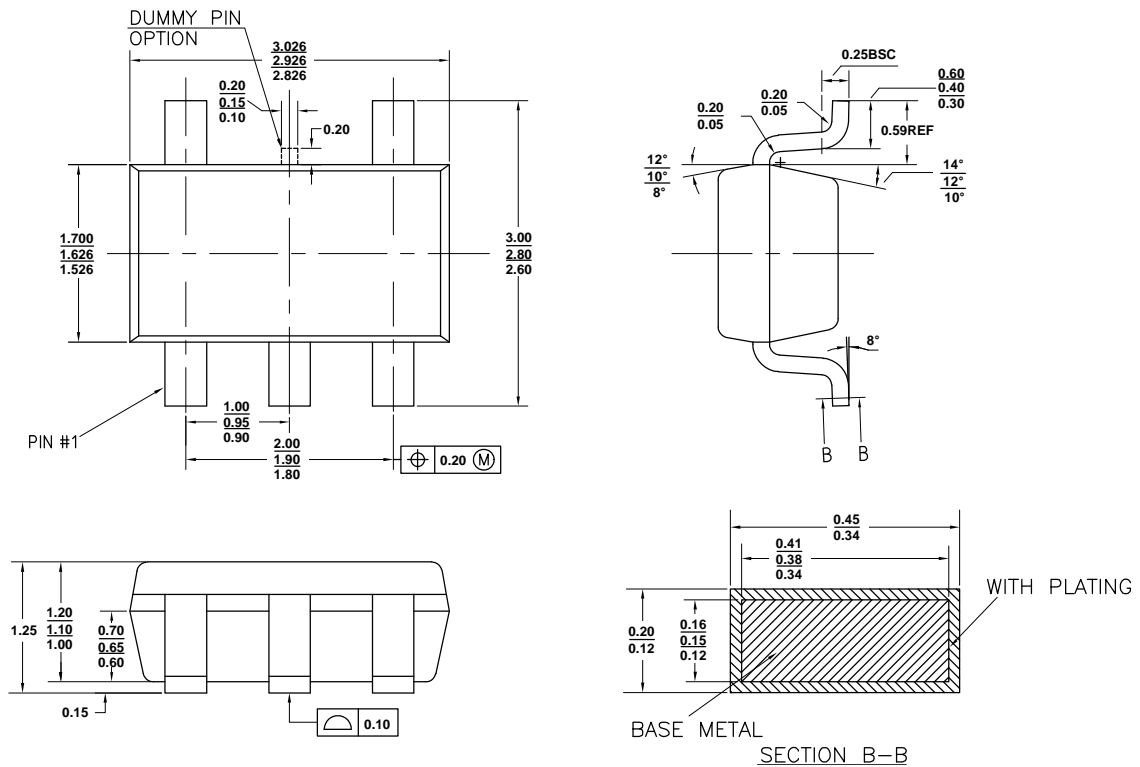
5-Lead SOT23 Package Dimensions shown in millimeters
